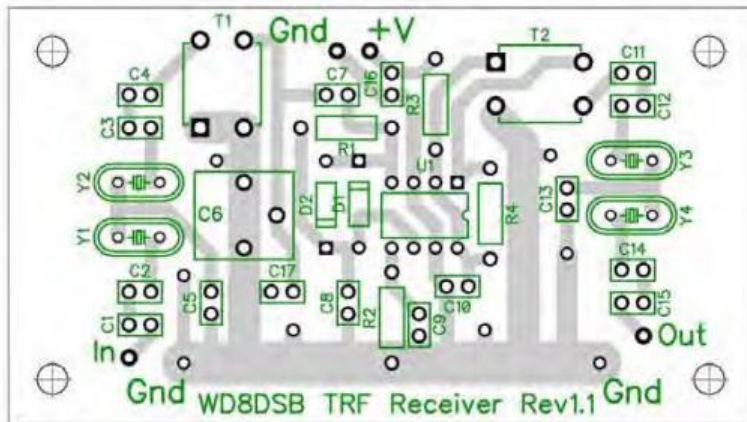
Image of the TRF receiver 3.4 × 1.9 inch PC board.
